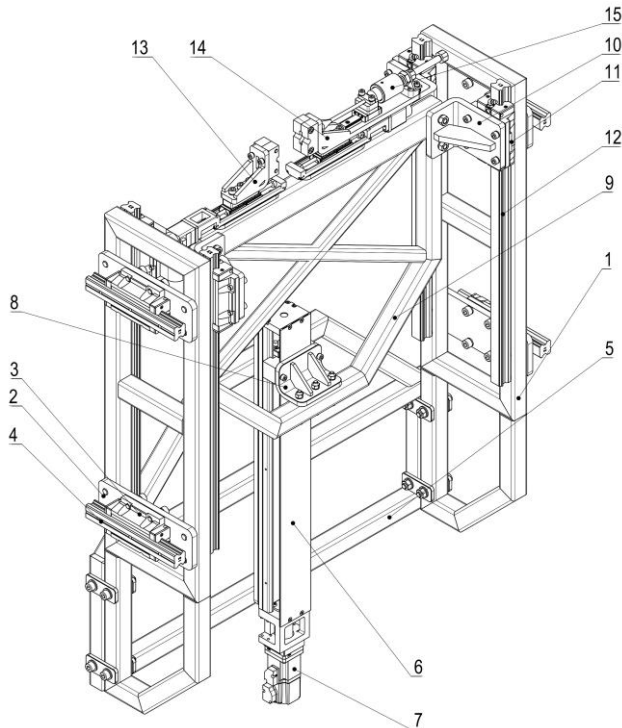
Heater assembly: 1 – main frame, 2 – horizontal guide plate, 3 – translational movement guide carrier, 4 – guide rail, 5 – auxiliary frame, 6 – vertical movement drive system, 7 – vertical movement stepper motor, 8 – welding table bracket, 9 – welding table frame, 10 – vertical guide carrier, 12 – vertical guide rail, 13 – left-hand die sub-assembly, 14 – left-hand die sub-assembly, 15 – heater
